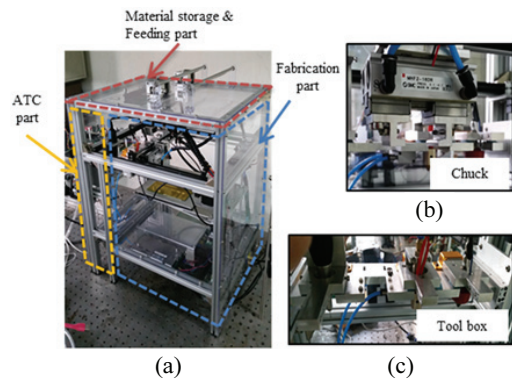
Hybrid-FDM system using ATC: (a) Overview of entire system, (b) View of pneumatic chuck in Fabrication part, (c) View of toolbox in ATC part
